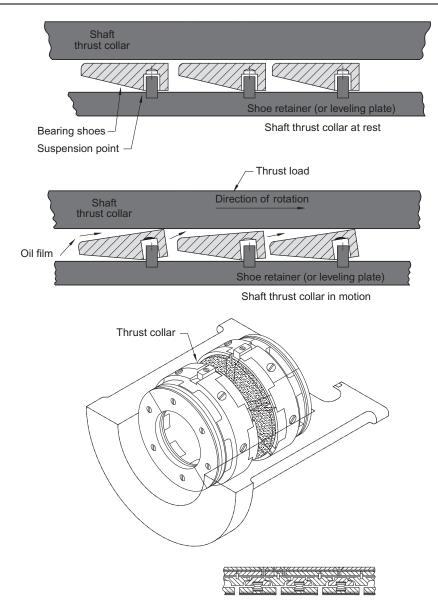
Top*: Kingsbury thrust bearing; *Bottom*: Self-equalizing tilting-pad thrust bearing. Courtesy of the Elliott Company.
